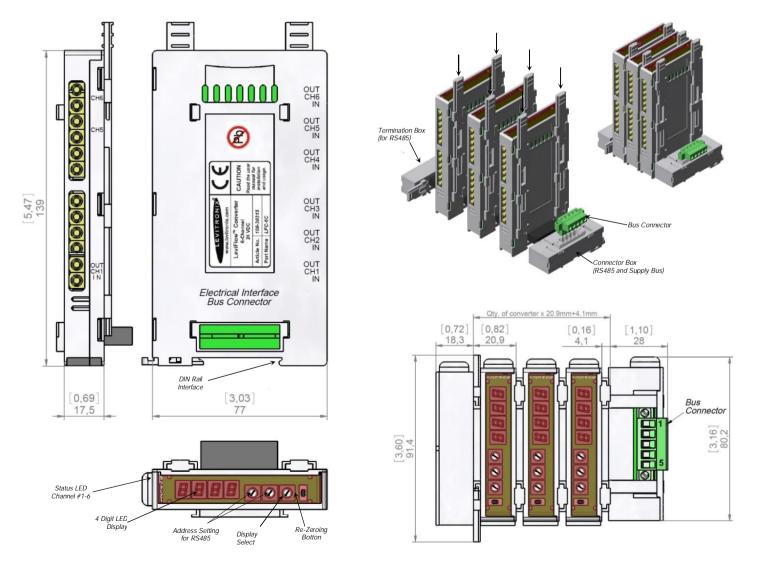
Dimensions, mounting and stacking concept for LFC-6C
